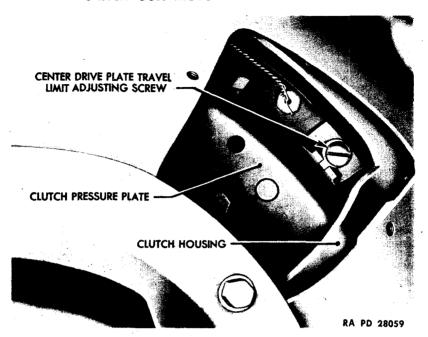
Inspection Plate Removed from Left Side of Clutch Housing
